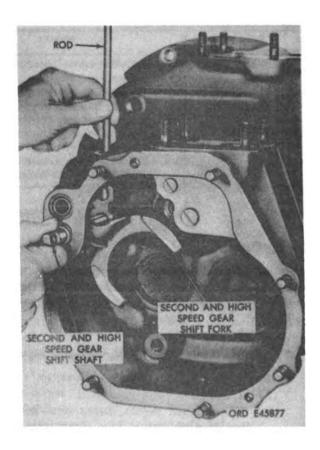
Installing second- and high-speed gear shift shaft—M274A3 only.
